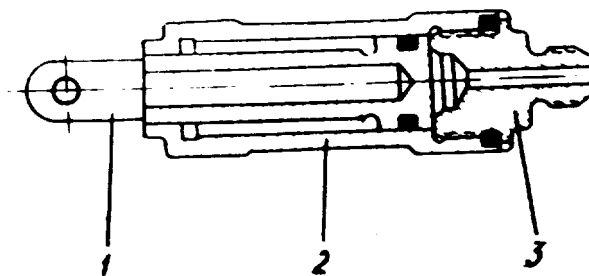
EXPLOSIVE CHARGE ACTUATED CYLINDER
